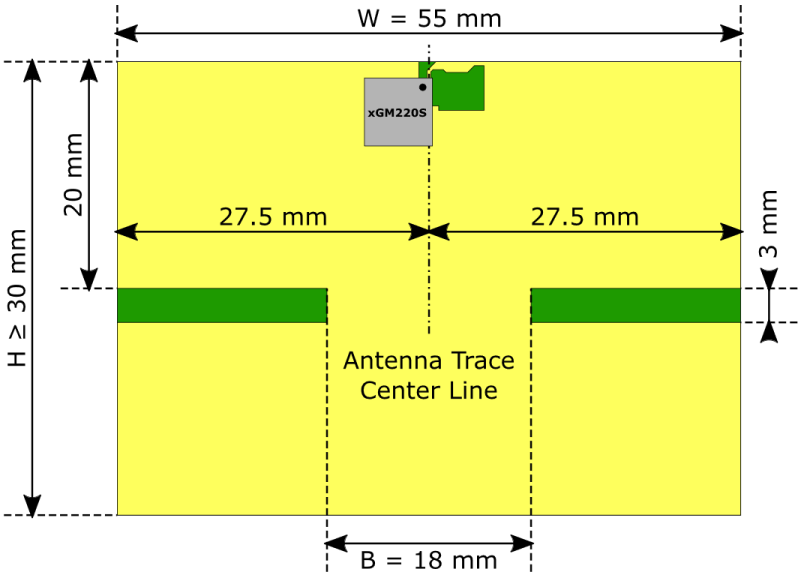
Recommended PCB Layout for Extended H Dimension – Horizontal Metal Keep-Outs
